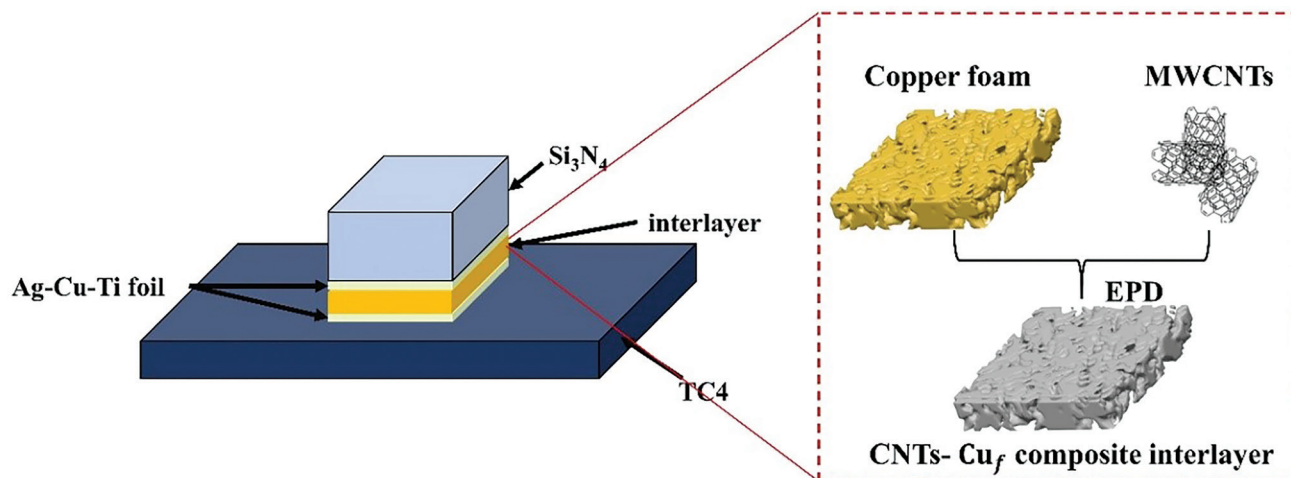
Schematic diagram of assembly form of sample to be brazed.
